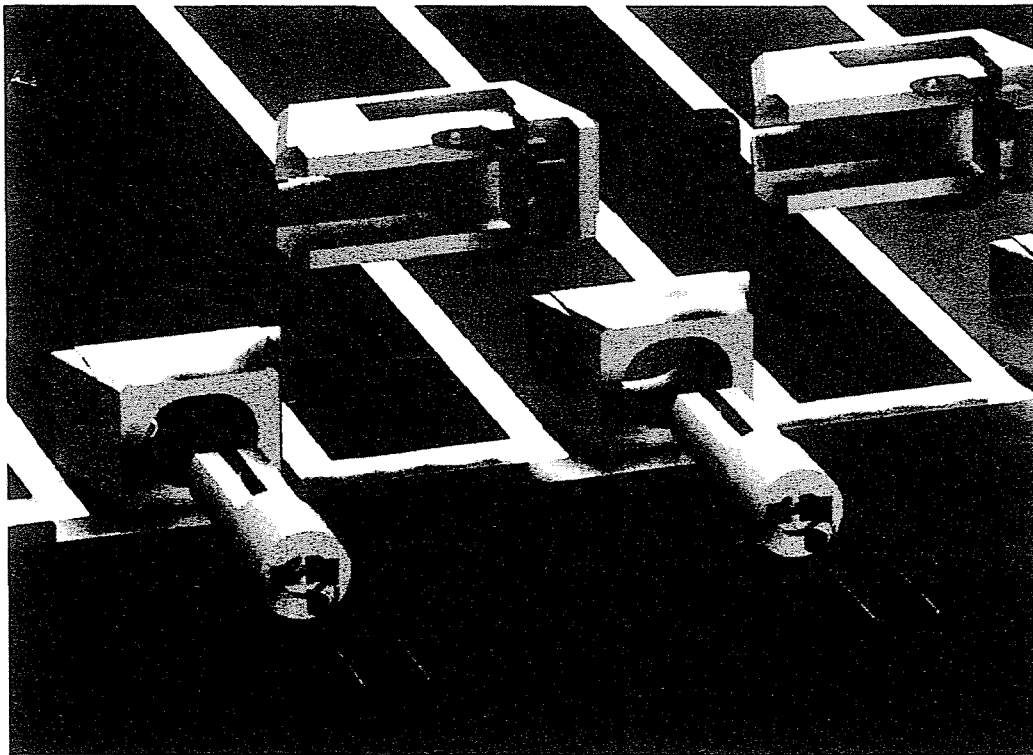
Exploded view of the end part of the drift cells showing the different endplugs and spring contacts for High Voltage connections.
